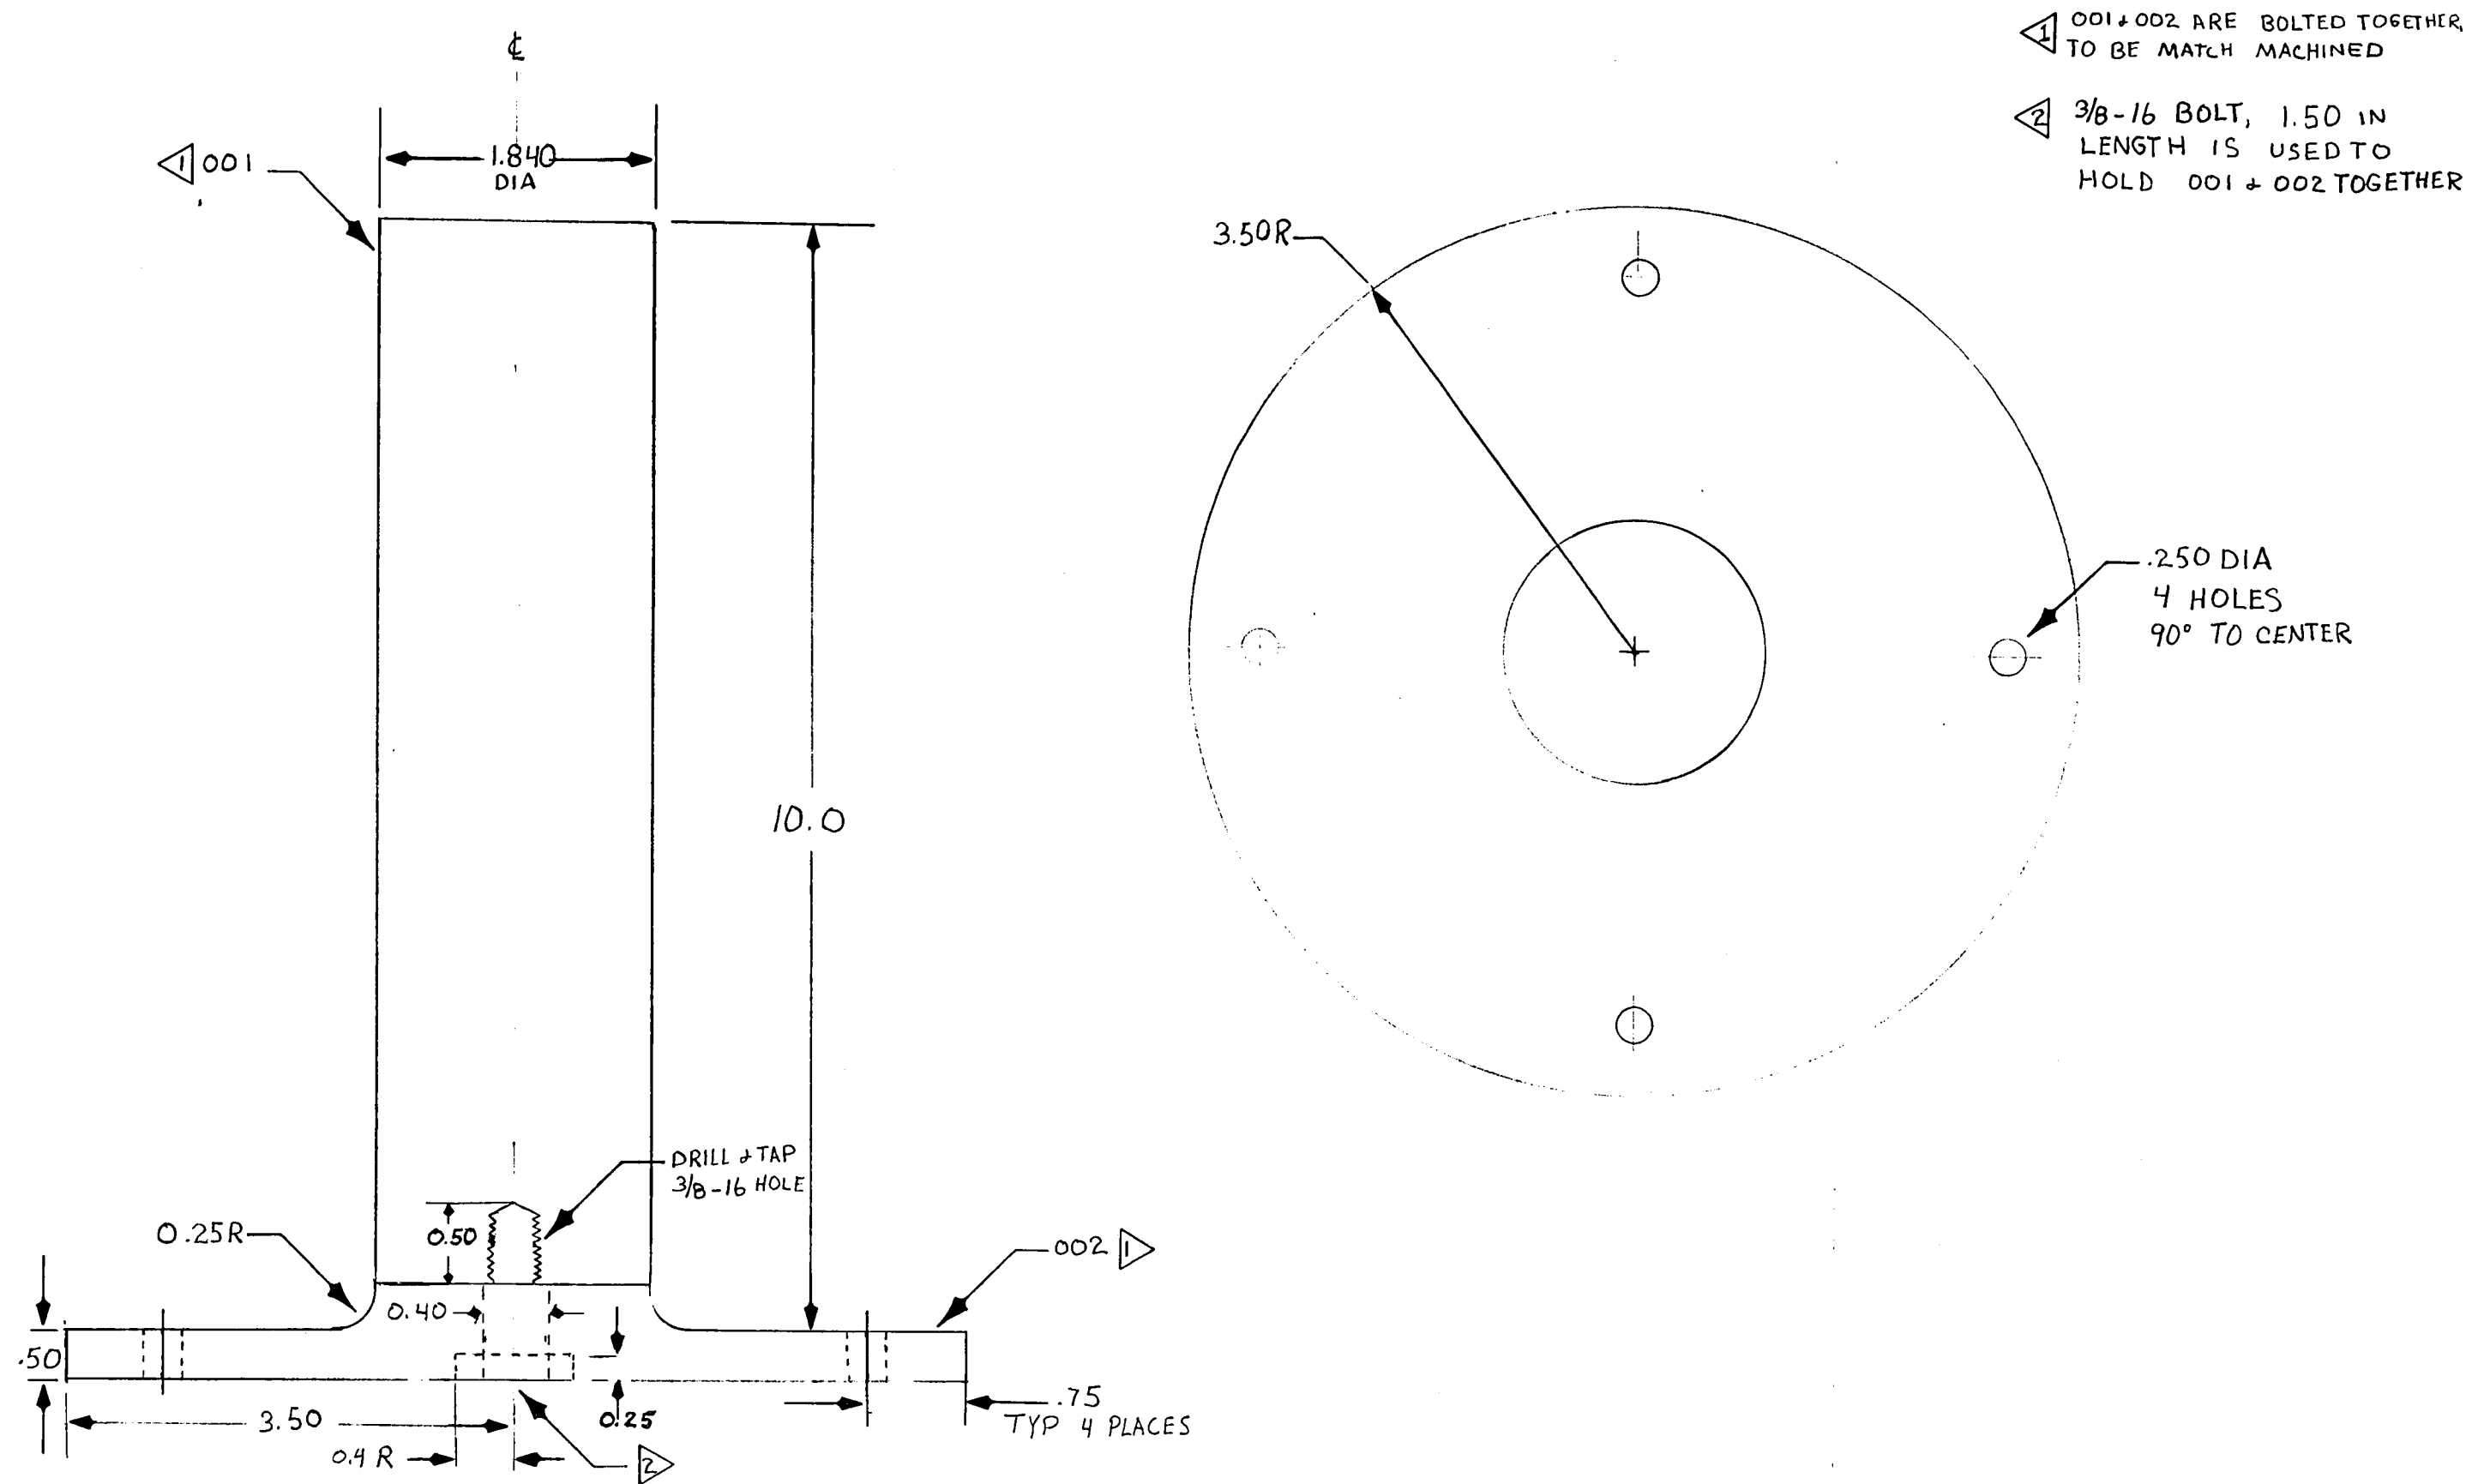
shows a side and an end view of a completed fixed trunnion configuration. Figure IV-8 shows a front and a side view of a completed floating trunnion configuration.
